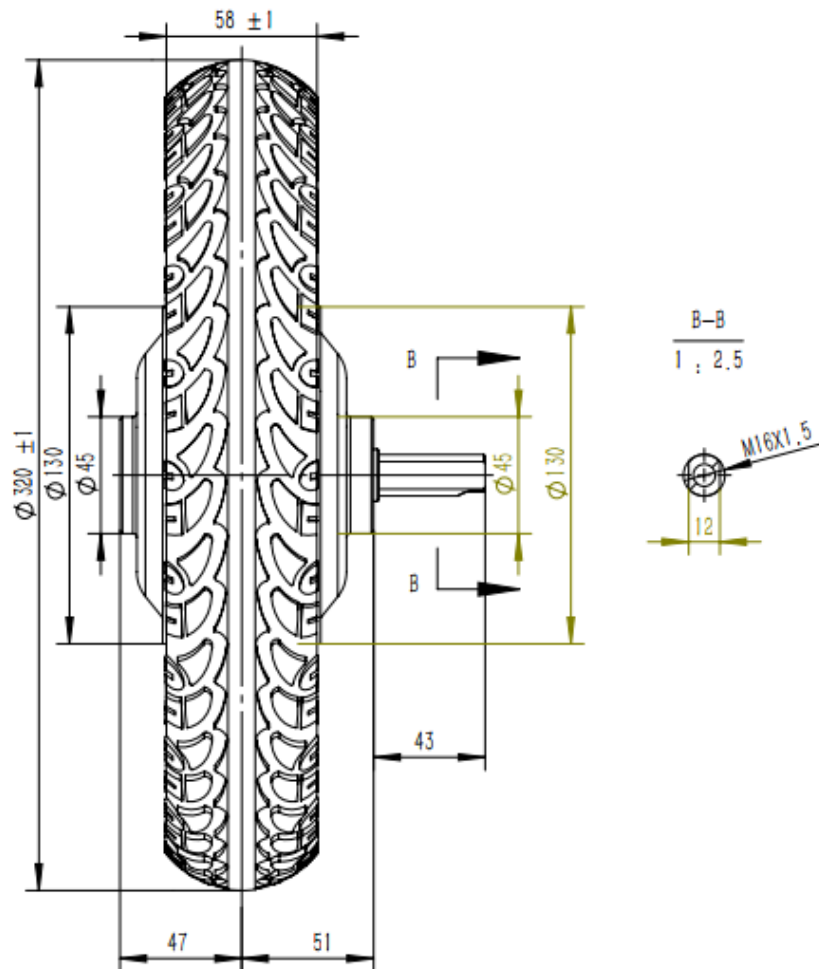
Installation dimensions of 12-inch 13Nm/15Nm inflatable tires (without brakes) hub motors
